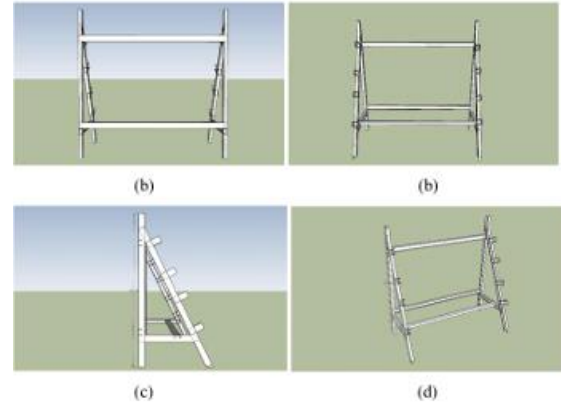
Hydroponic Frame Design Without Pipes (a) Rear View (b) Front View (c) Side View (d) Perspective View
